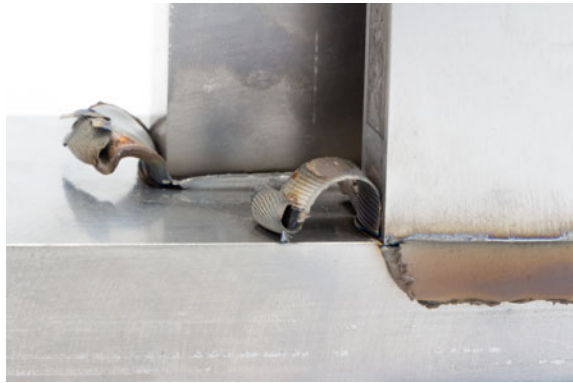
Near-net-shape blank after LFW (left) and final part after machining (right). (Color figure online)
